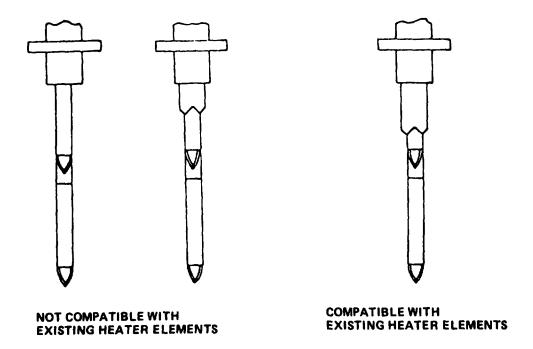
Exhaust Thermocouple Assembly (1-300-177-02) - Configurations
